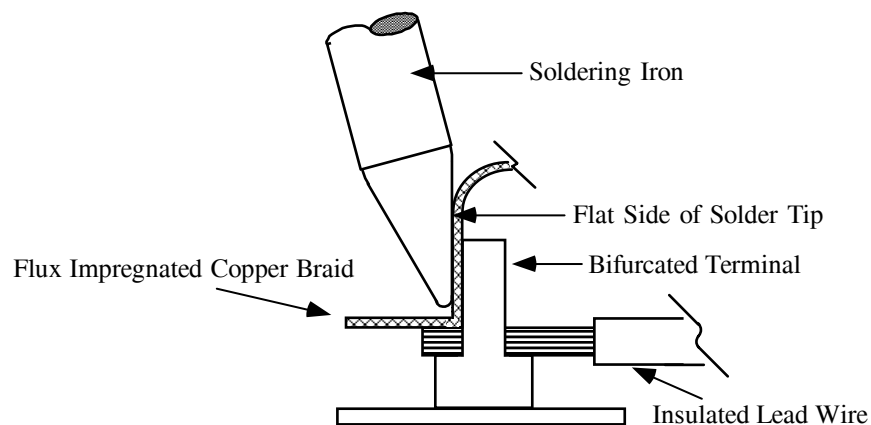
Removing Excess Solder from a Bifurcated Terminal.
